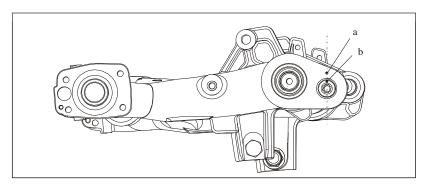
Mark on Torsion Bar Spring and Rocker arm
